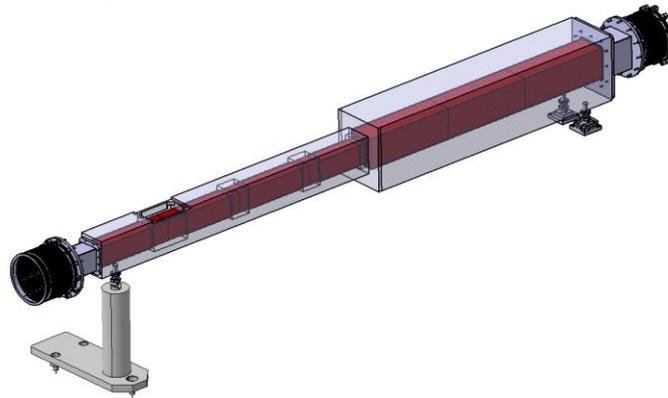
Vacuum vessel assembly. Access aperture for alignment in the housing.
